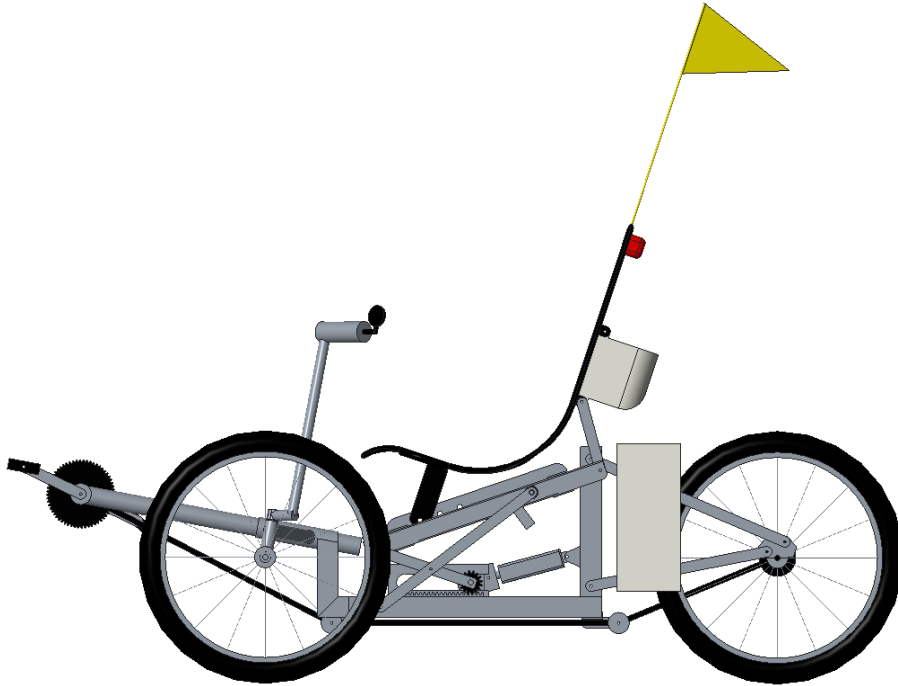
Side View of Redesigned Heliocycle in Lowered Position.
